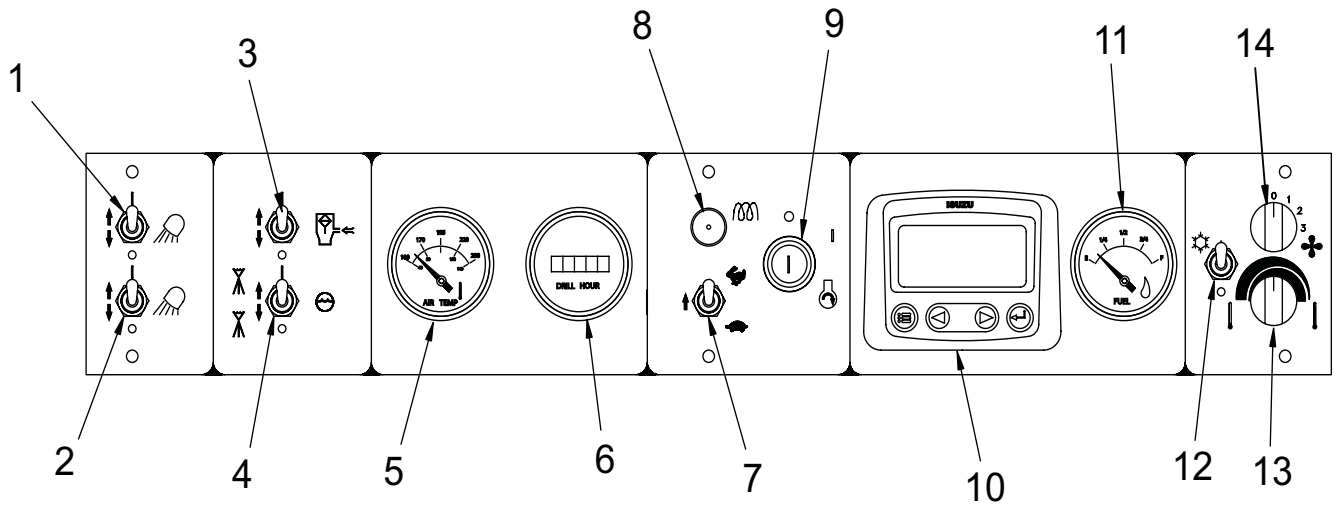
Overhead Console (ref. 436599 rev. B)
